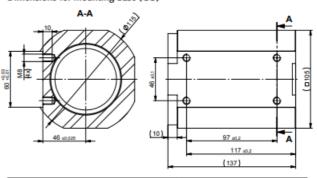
Type 45038... size 4 All dimensions without tolerances comply with ISO 2768-mH
